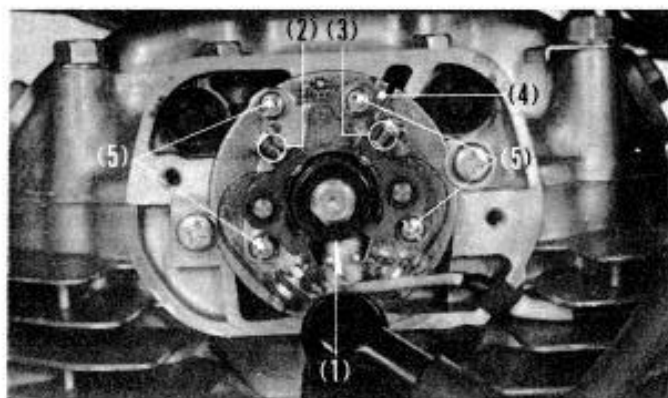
(1) Point cam (5) Contact breaker plate locking screw
